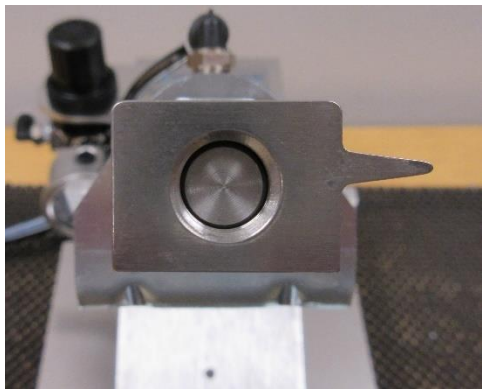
Jaw threaded 2/3-3/4 onto shaft
